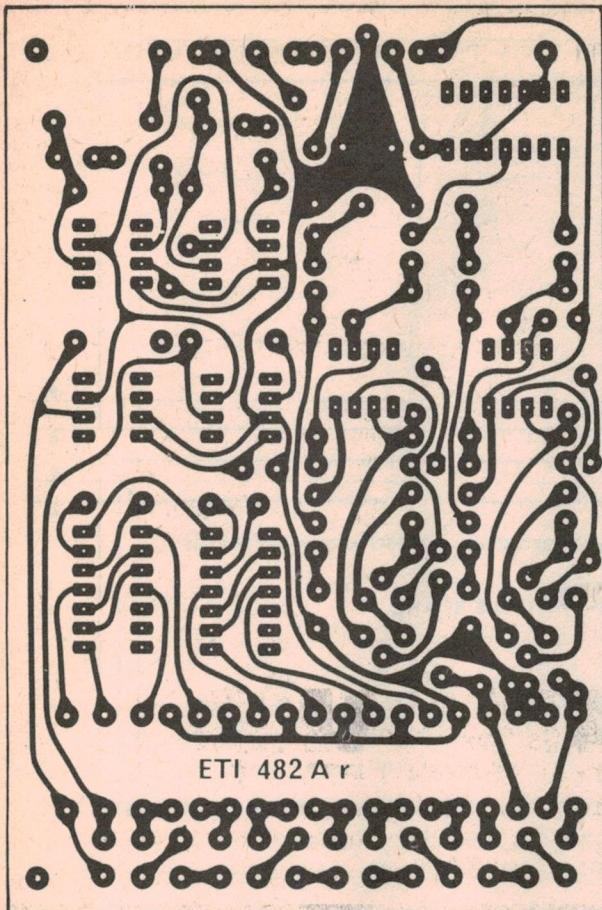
Printed circuit layout (both sides) of the preamp board. Full size 120 x 80 mm.
